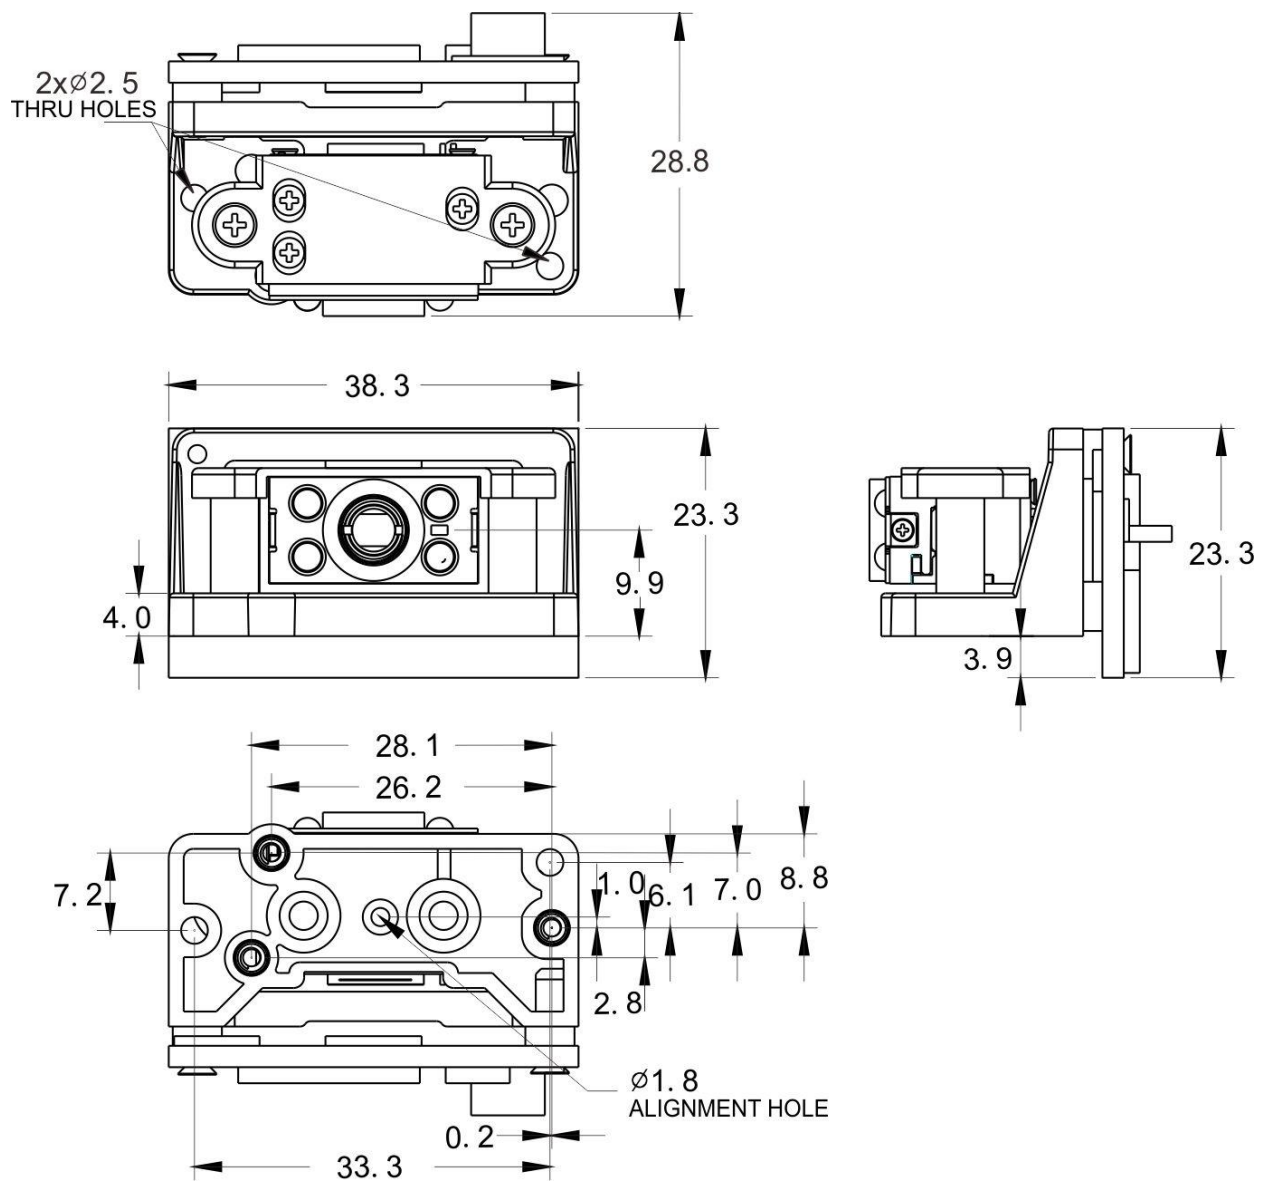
Dimensions of type-II bracketed Image Engine (Units = mm)
